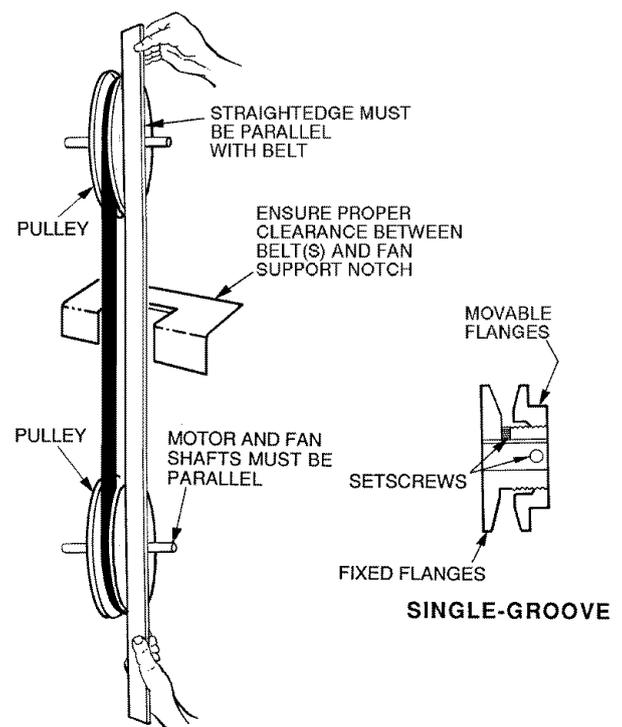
Evaporator-Fan Pulley Alignment and Adjustment
